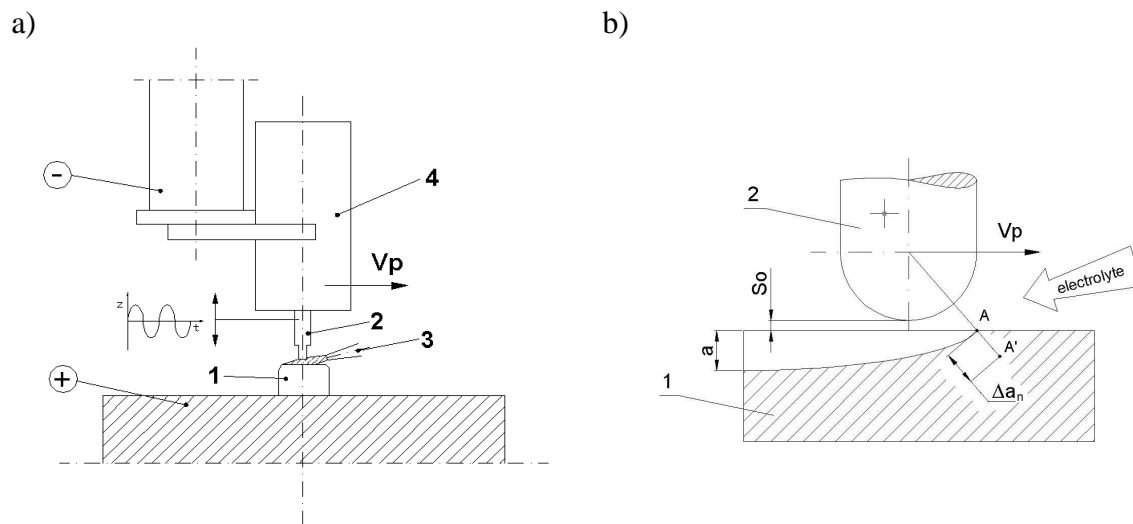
Scheme of test stand for experiments (a) and machining in experiment (b); 1 – workpiece, 2 – electrode tool, 3 – electrolyte inlet, 4 – ultrasonic head, v_p – direction of machining, a - removed allowance thickness
